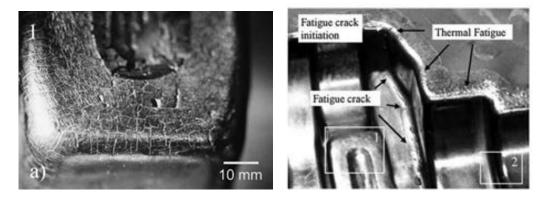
Damage in the hot forging tool – overview (2)
